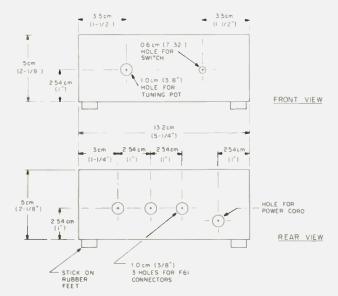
Front and rear panel layout of the power supply/tuning unit chassis.
